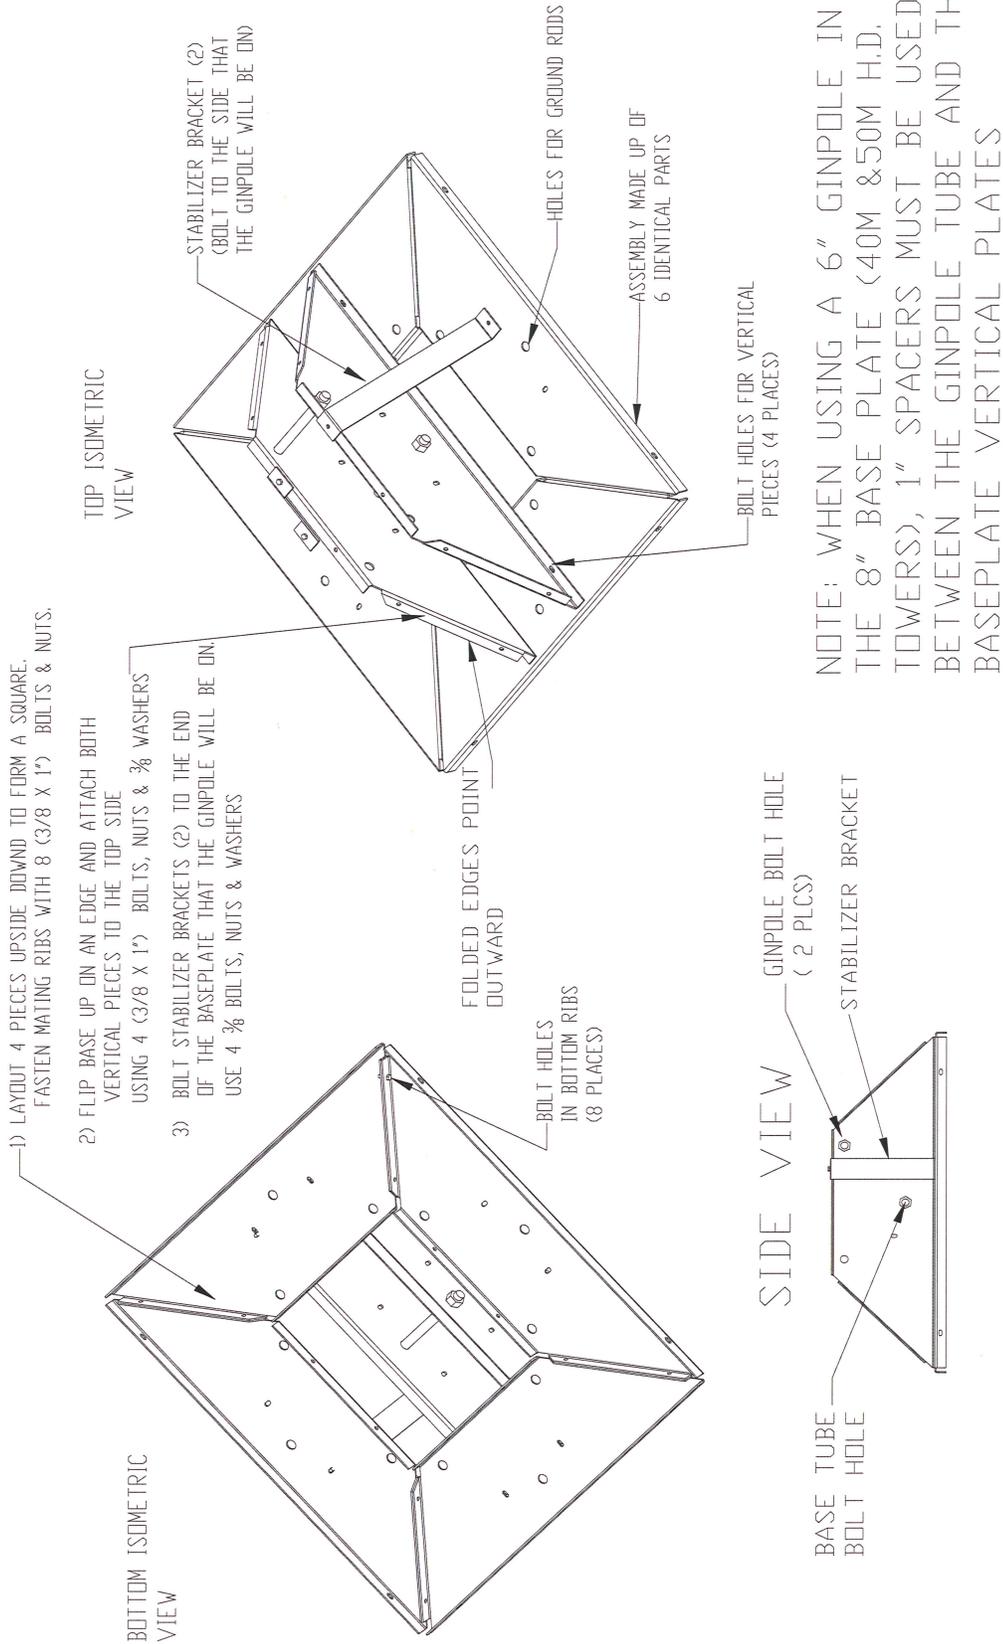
TallTower Base Plate Assembly (for 6 inch and 8 inch dia. towers)
